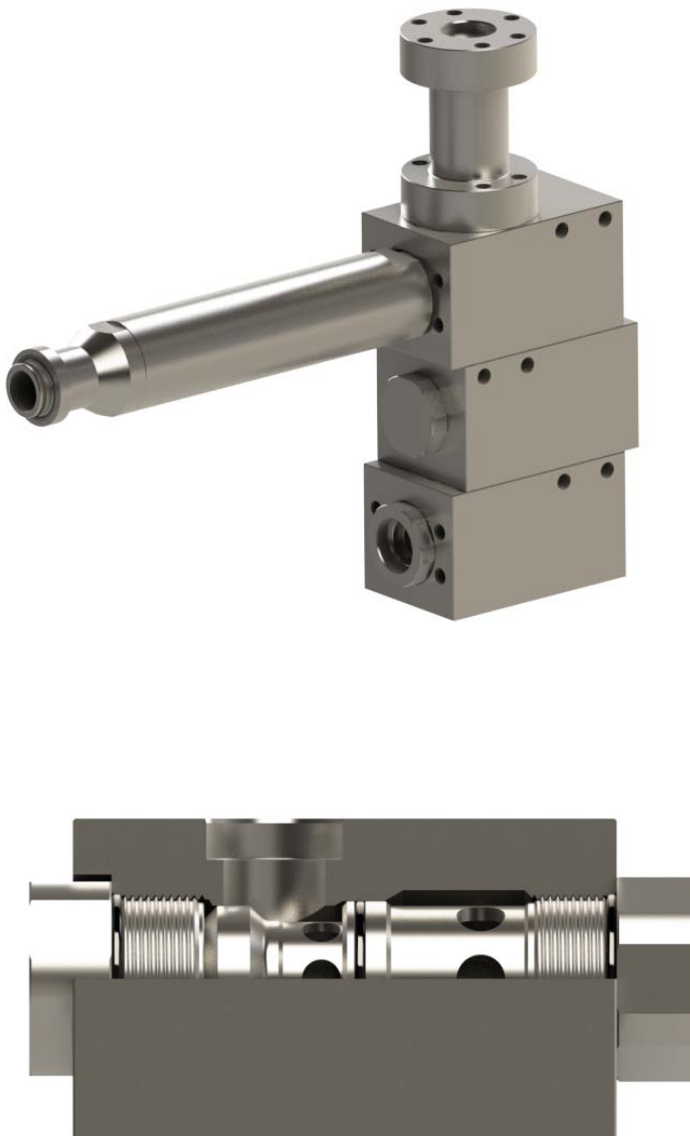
PN 29059: 1-1/2" MKIV Shuttle Valve, Inline, Code 62, Low Interflow, High Drag
